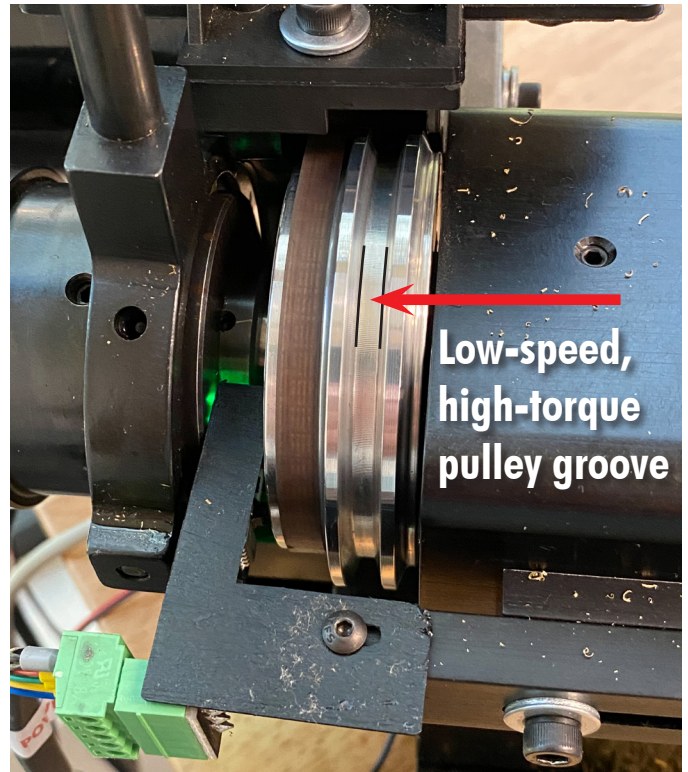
Use the pulley groove closest to the headstock for low-speed, high-torque settings.
